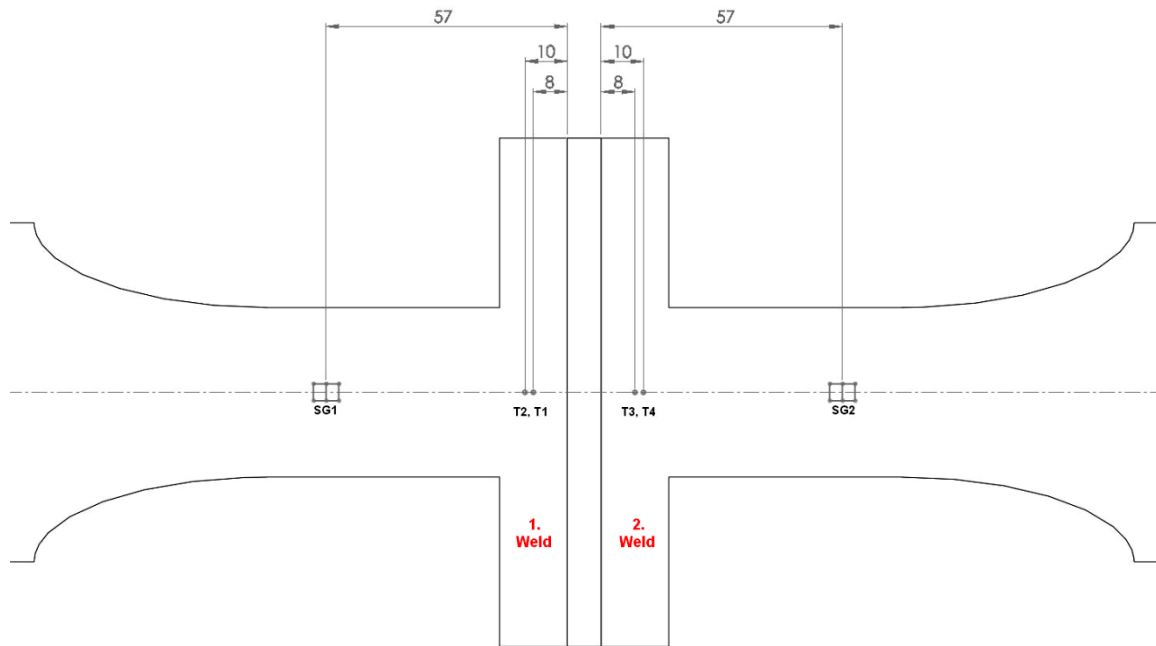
Schematic of experimental setup for measuring the residual stresses during welding
